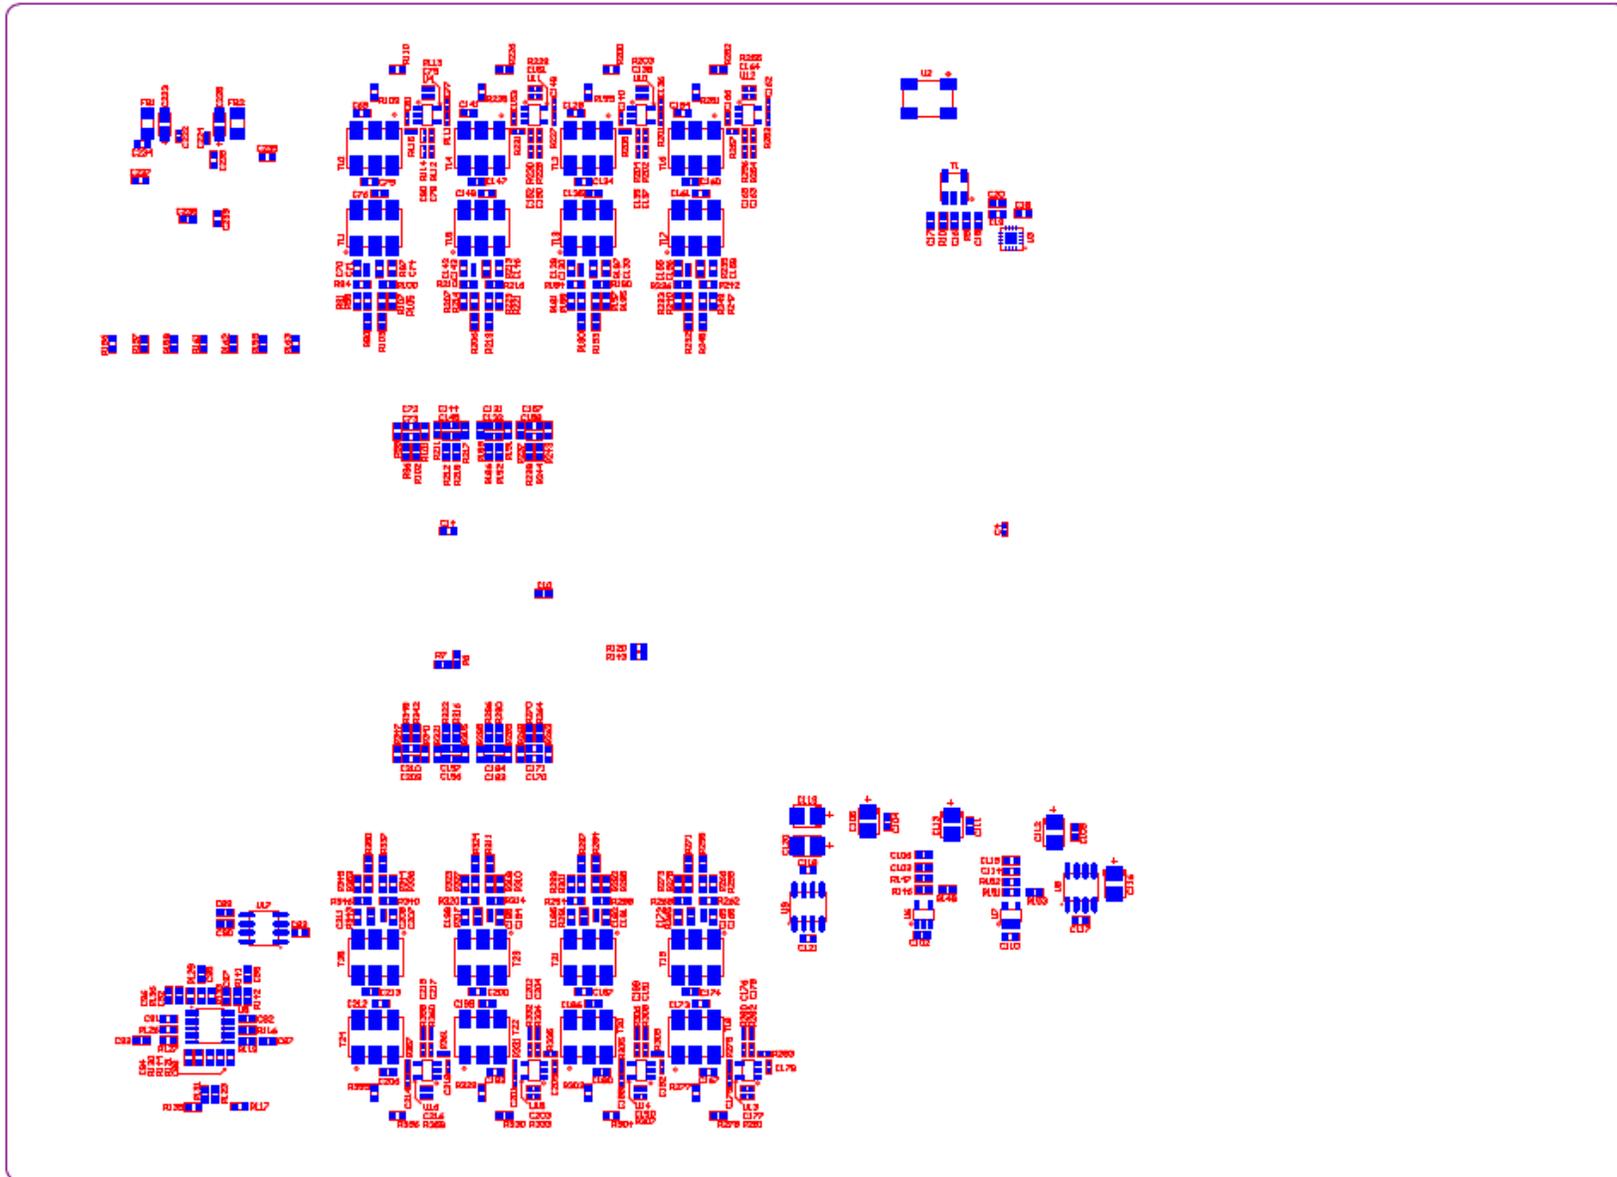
PGA5807 EVM Bottom Layer Assembly Drawing – Bottom View
